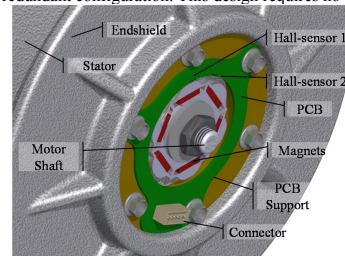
In-shaft type magnetic resolver inserted in an endshield of a machine.
